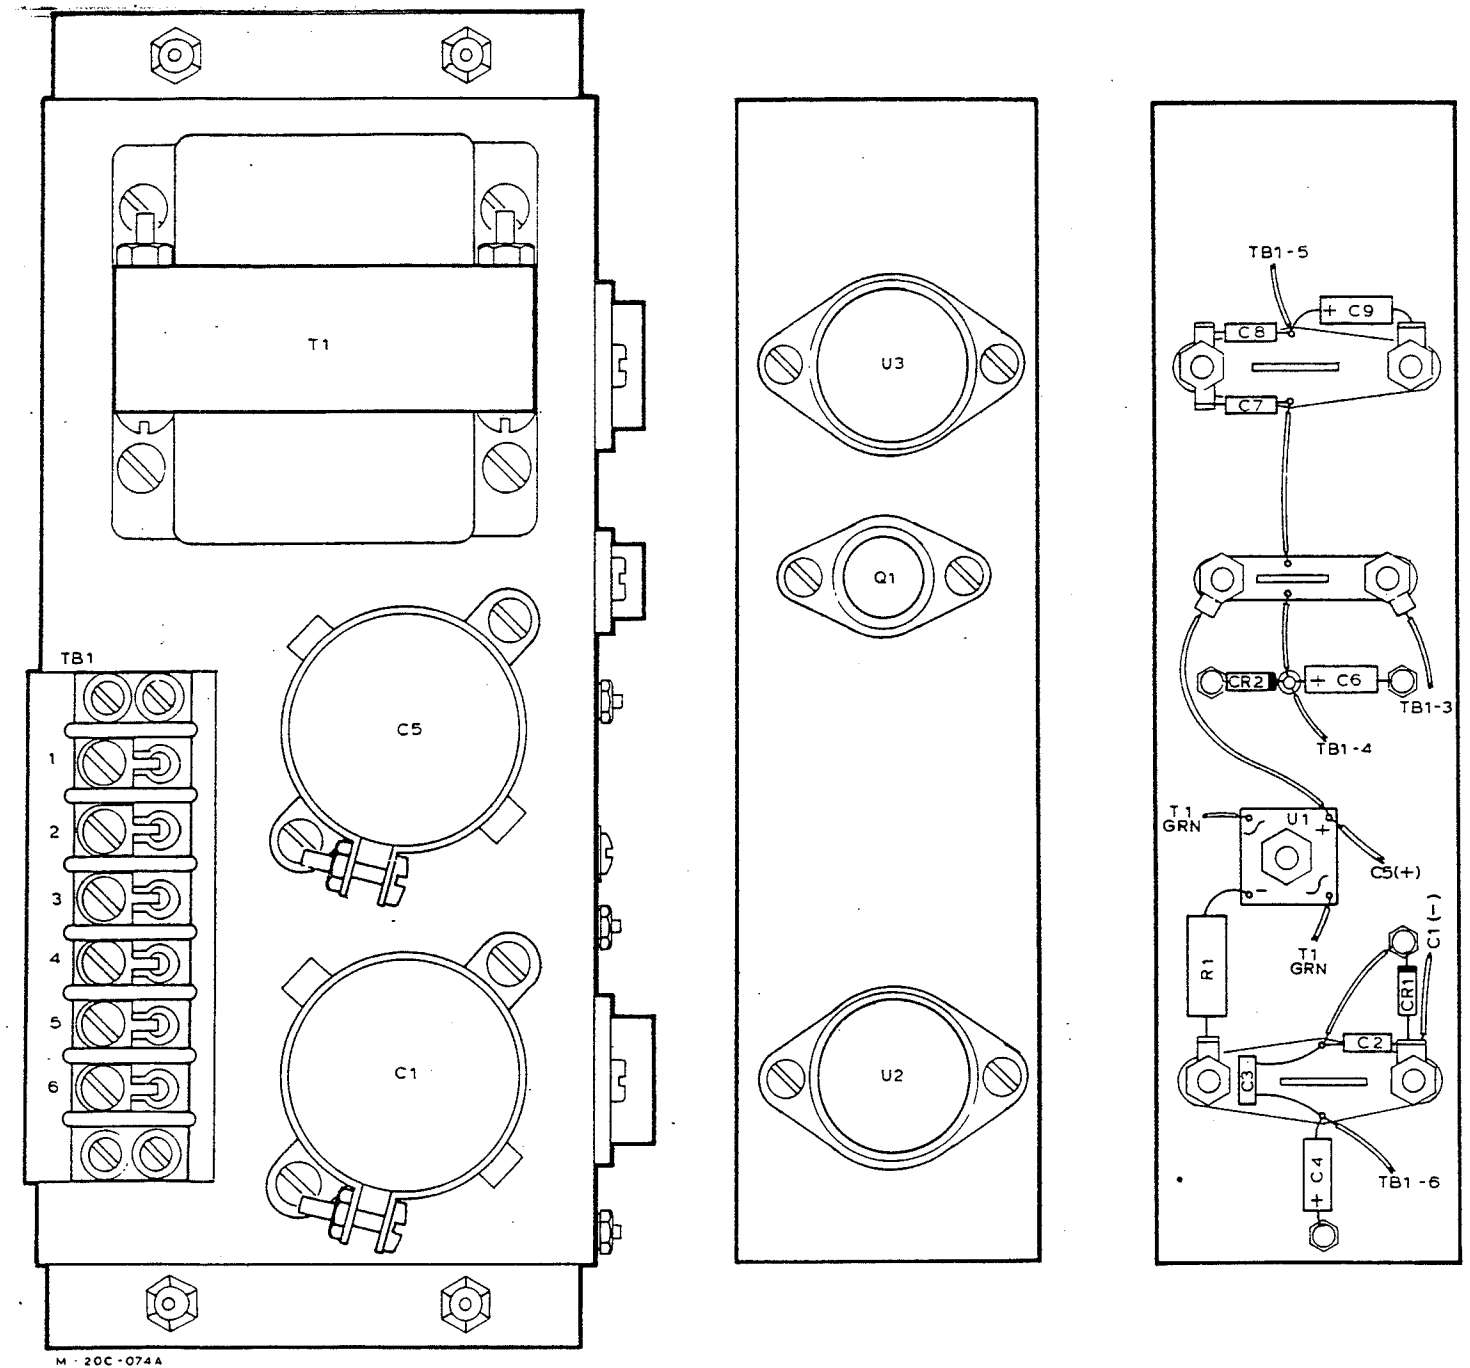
Assembly Detail - NAS18 Low Voltage Power Supply Assembly
